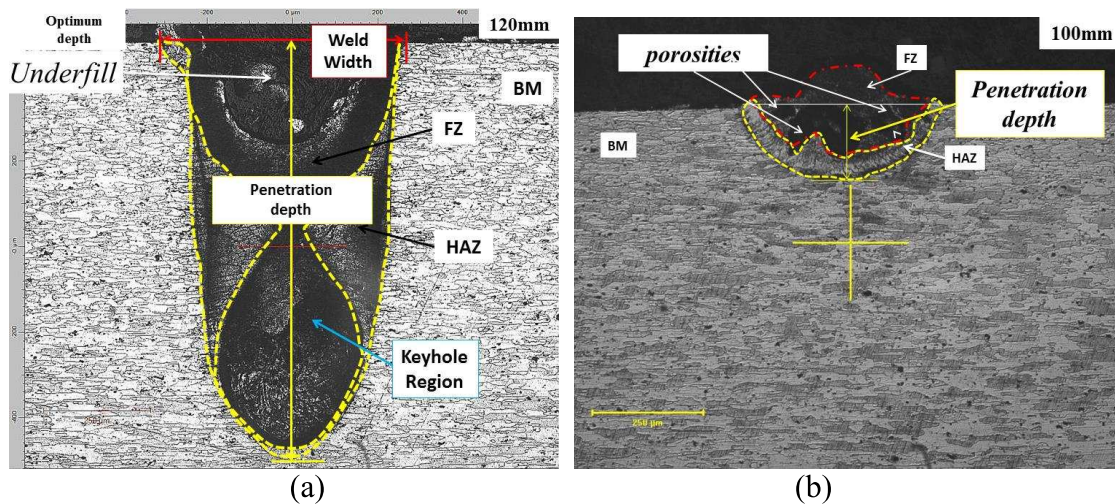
AA7075 BOP laser welded (a) PW (b) CW (10 x magnifications).
